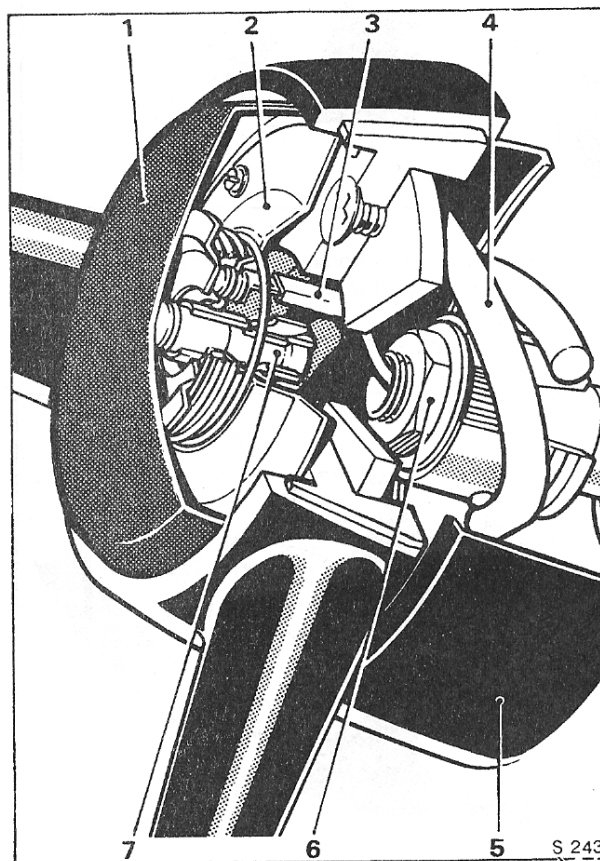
Steering wheel components. Silver Shadow II, Silver Wraith II and Bentley T2
